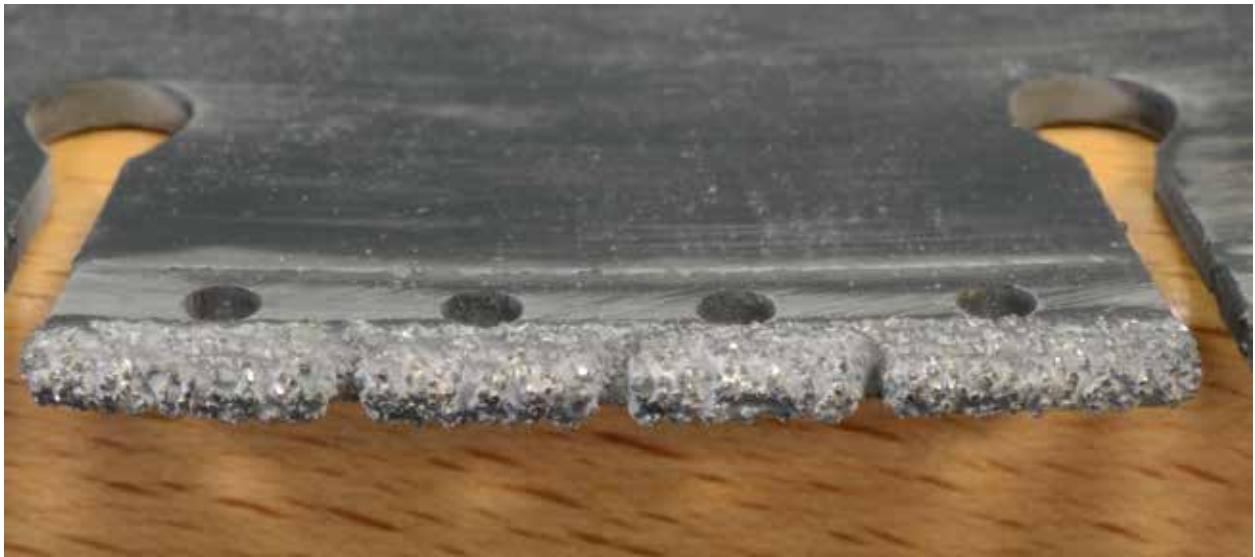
Diamond Saw Blade, G5, Dry Cuts
